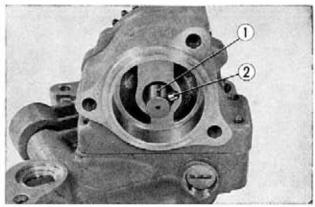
① Oil pump rotor shaft ② Dowel pin
